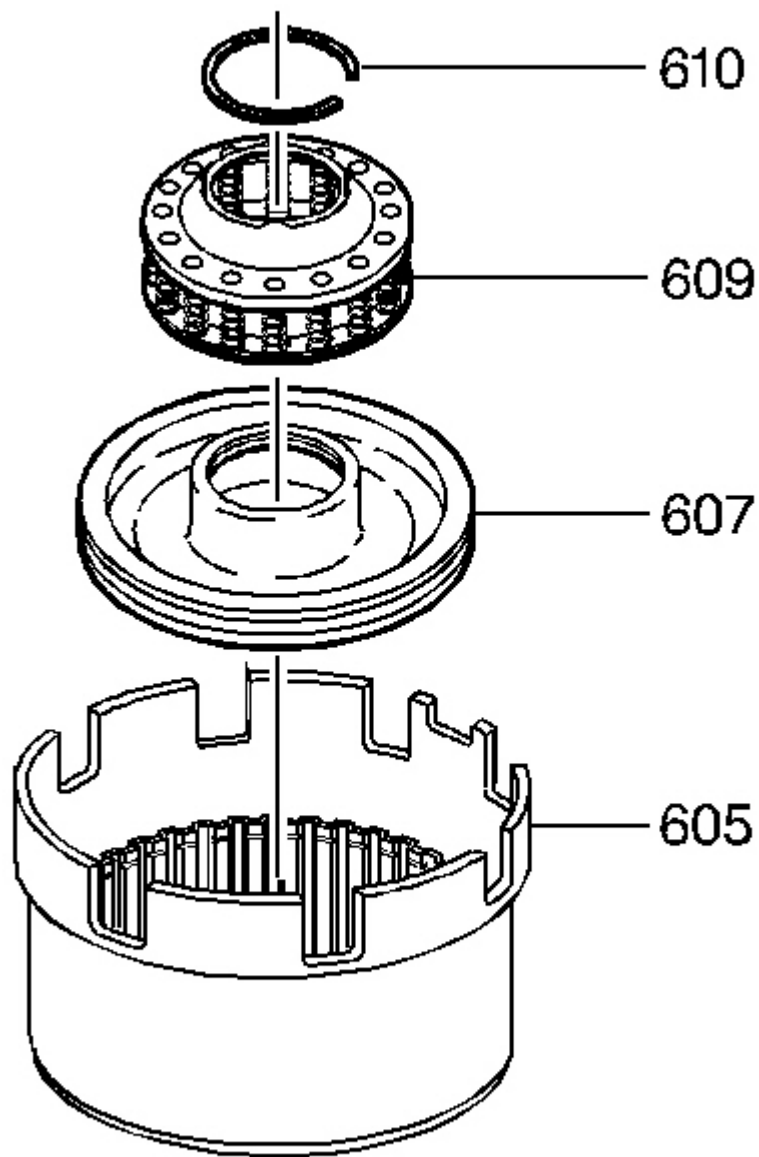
Identifying Reverse Input Clutch Spring & Piston Assemblies
